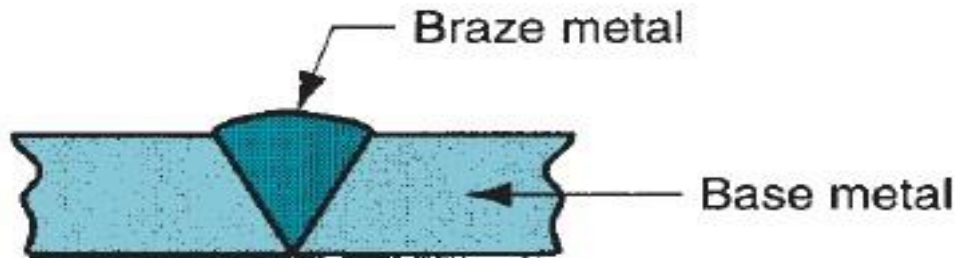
Braze welding. The joint consists of braze (filler) metal; no base metal is fused in the joint.
